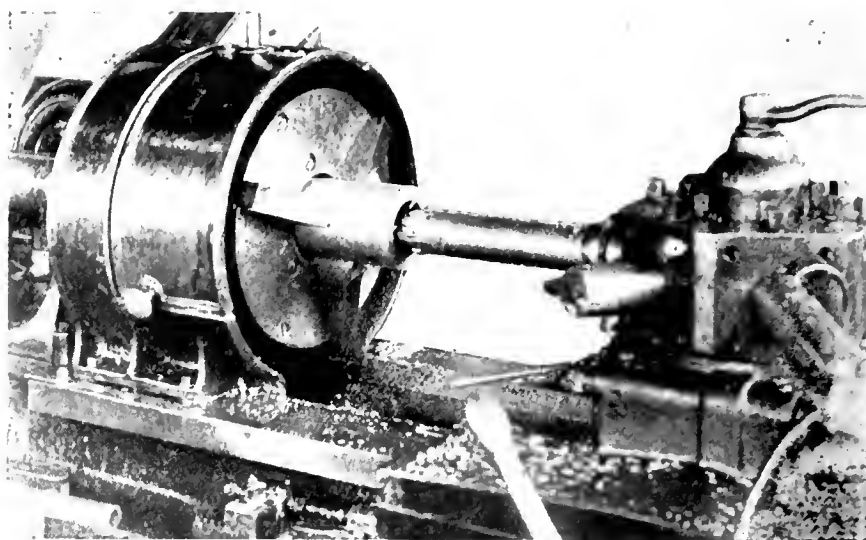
CLOSE VIEW OF INSIDE BORE MACHINING OPERATION.
